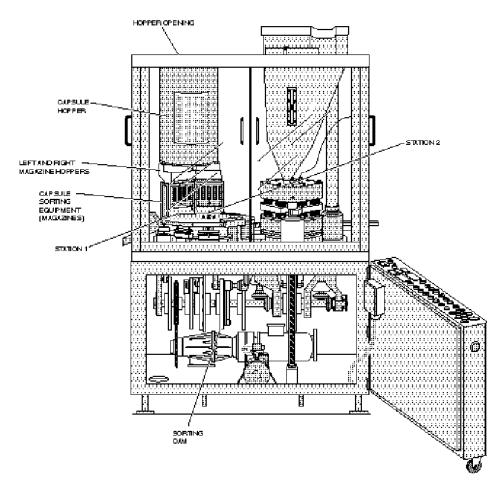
Locations of Capsule-Supply and Sorting Equipment
